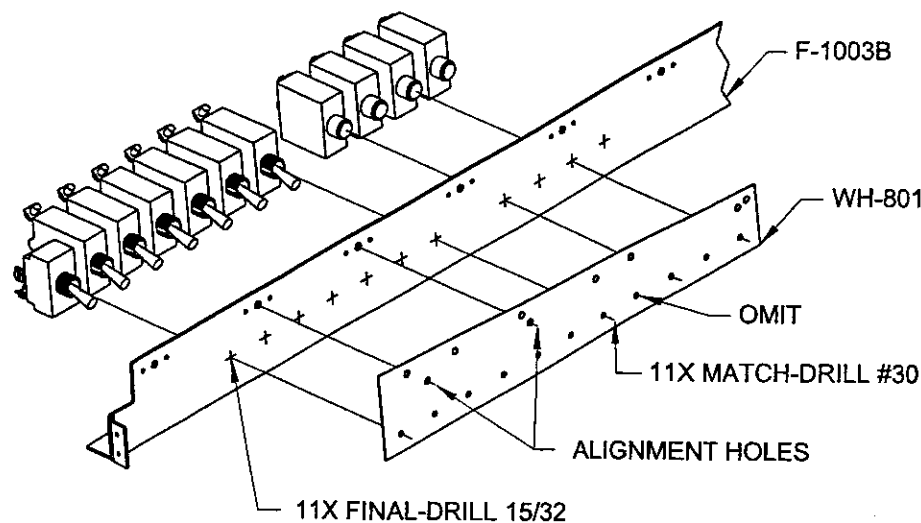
DRILLING INSTRUMENT PANEL LOWER FLANGE
